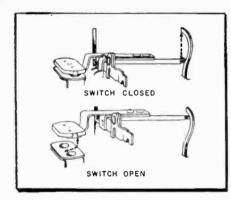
Typical toaster switch contacts are illustrated. This part is often a cause of toaster operating failure. The part could be bent, contact points themselves can be burnt, preventing completion of the circuit.
